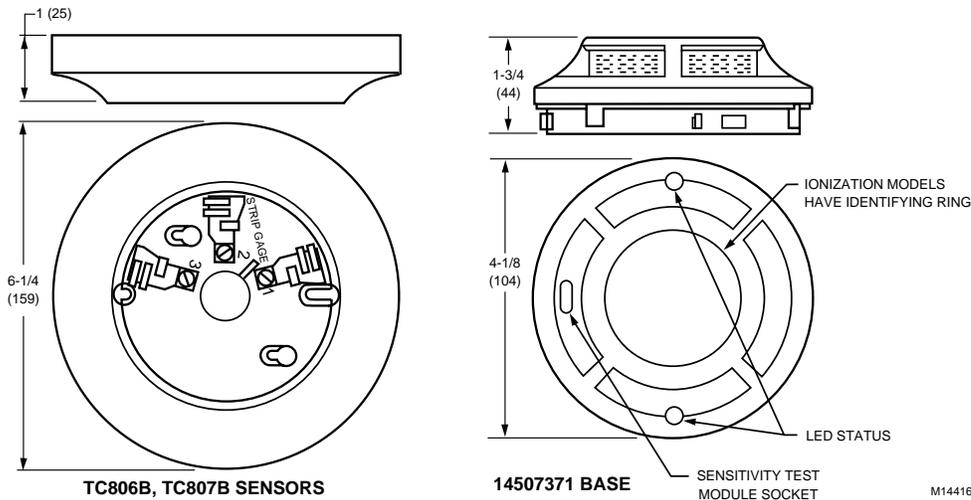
TC806B1076, TC806B1084, TC807B1059 Sensors, 14507371 Base dimensions in in. (mm).
